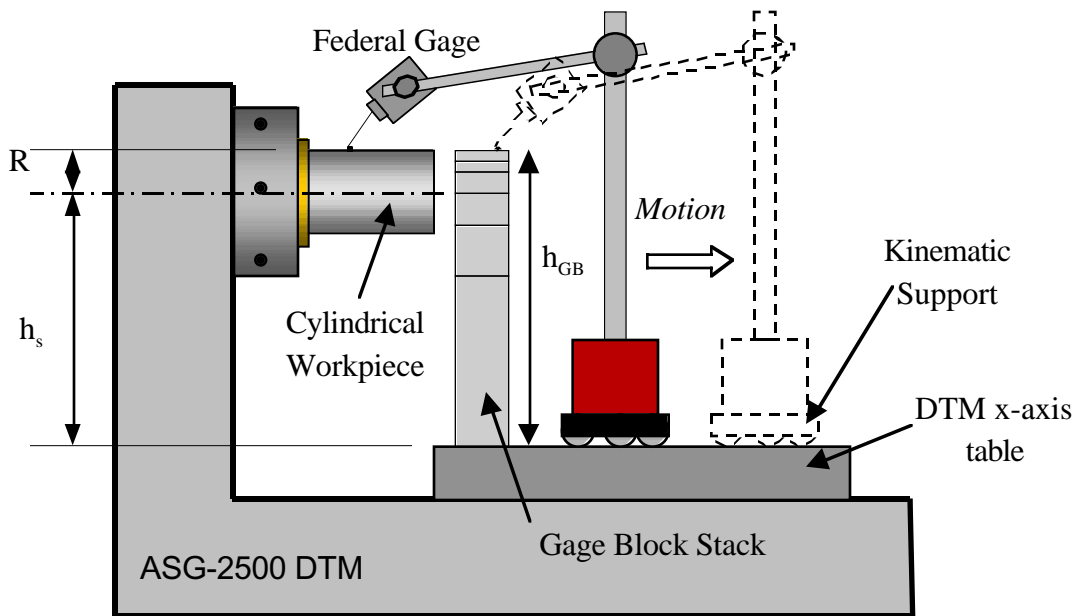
Apparatus used for measuring cylindrical Test Specimen #2 components
